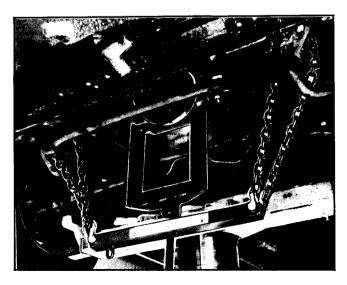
Engine Lifting Tools Installed - V-8 F Series
